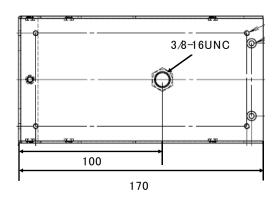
Drawing of the bottom panel of ARTCAM-2350SWIR
